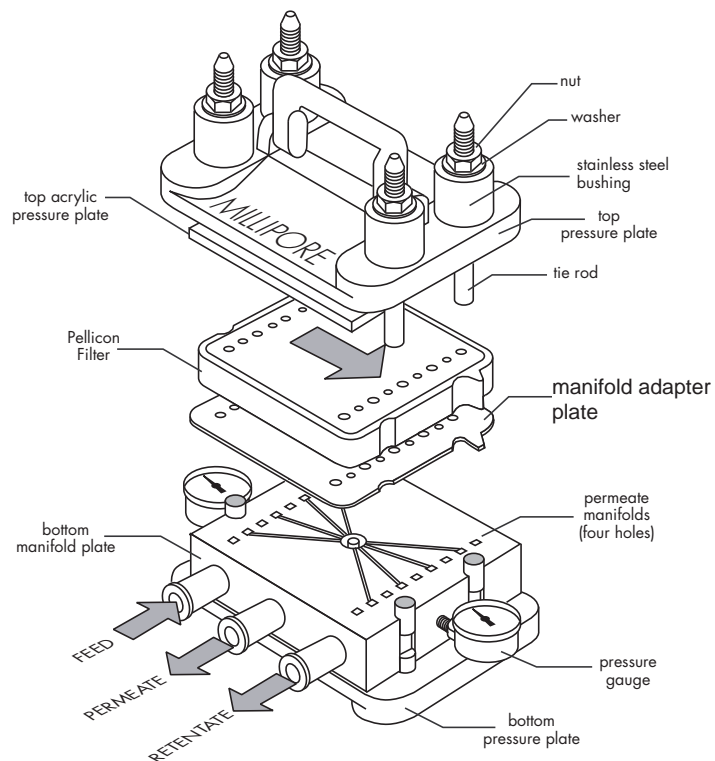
Exploded View of Acrylic Pellicon Cassette Filter Holder.
